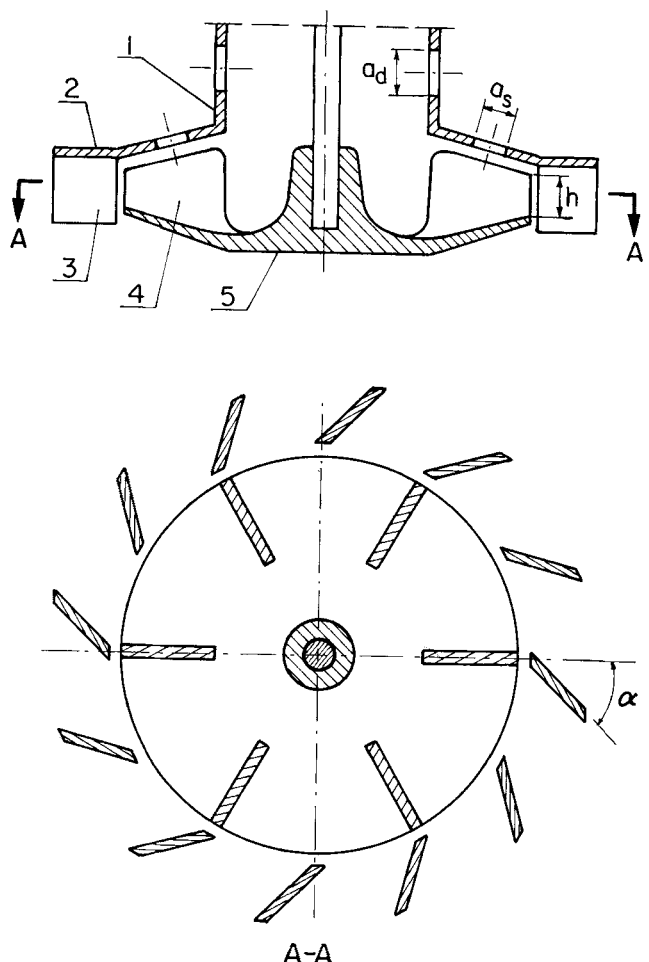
Self-inducing aerator principle design (type 1): (1) standpipe, (2) stator, (3) stator blades, (4) rotor blades, (5) rotor.
